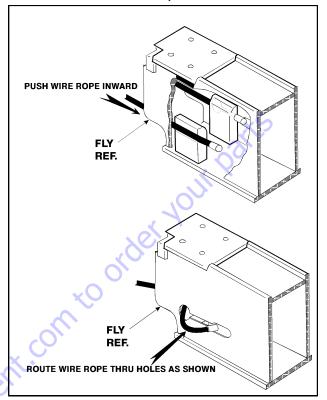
Boom Assembly Cutaway - Sheet 2 of 2
